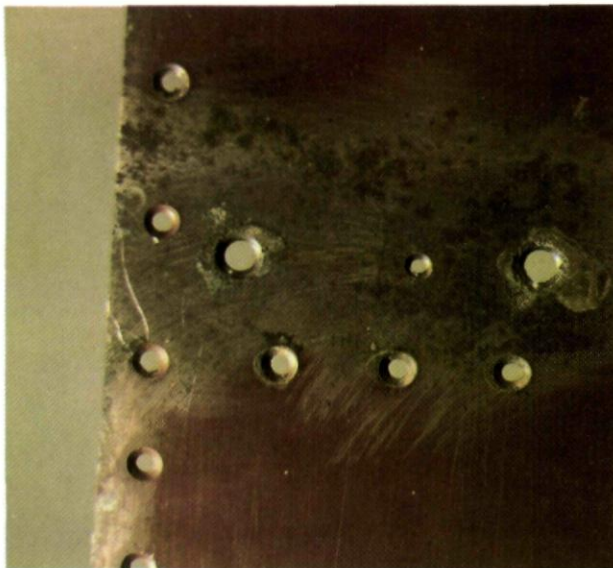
Galvanic corrosion around fastener holes used to locate steel fasteners in a magnesium alloy skin
